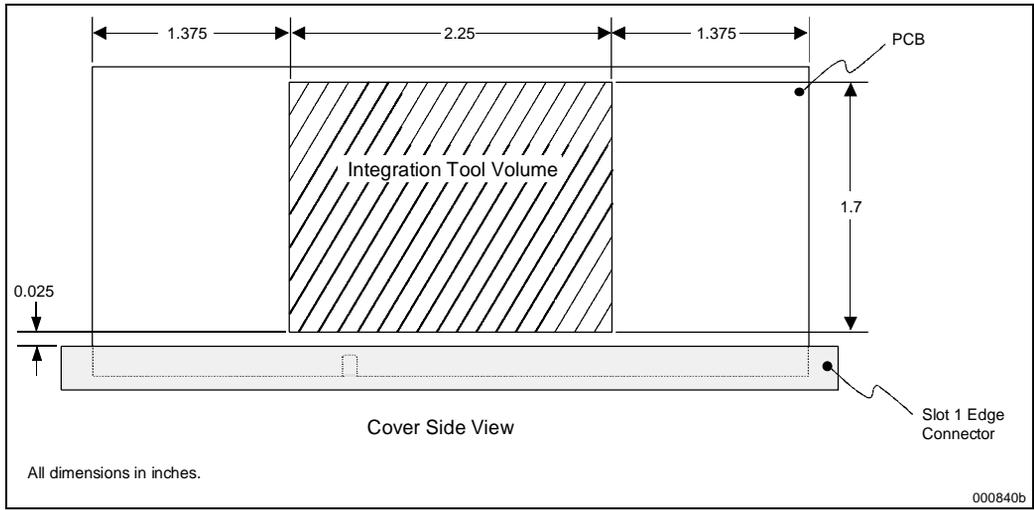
Pentium® II Processor Integration Tool Mechanical Keep Out Volume—Cover Side View
